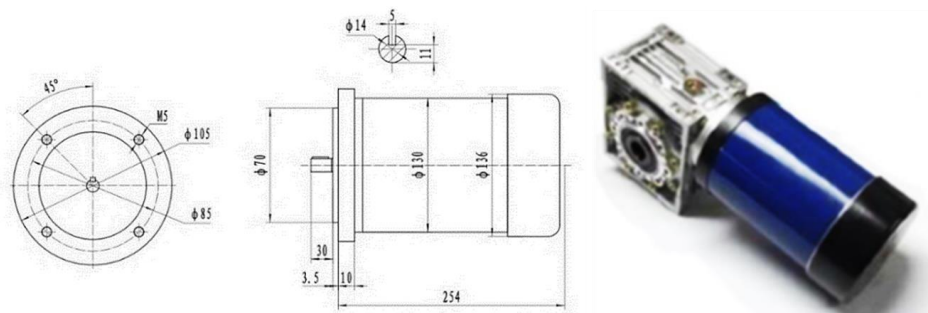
Worm-gear drive DC motor with dimensions from Motion Dynamics
